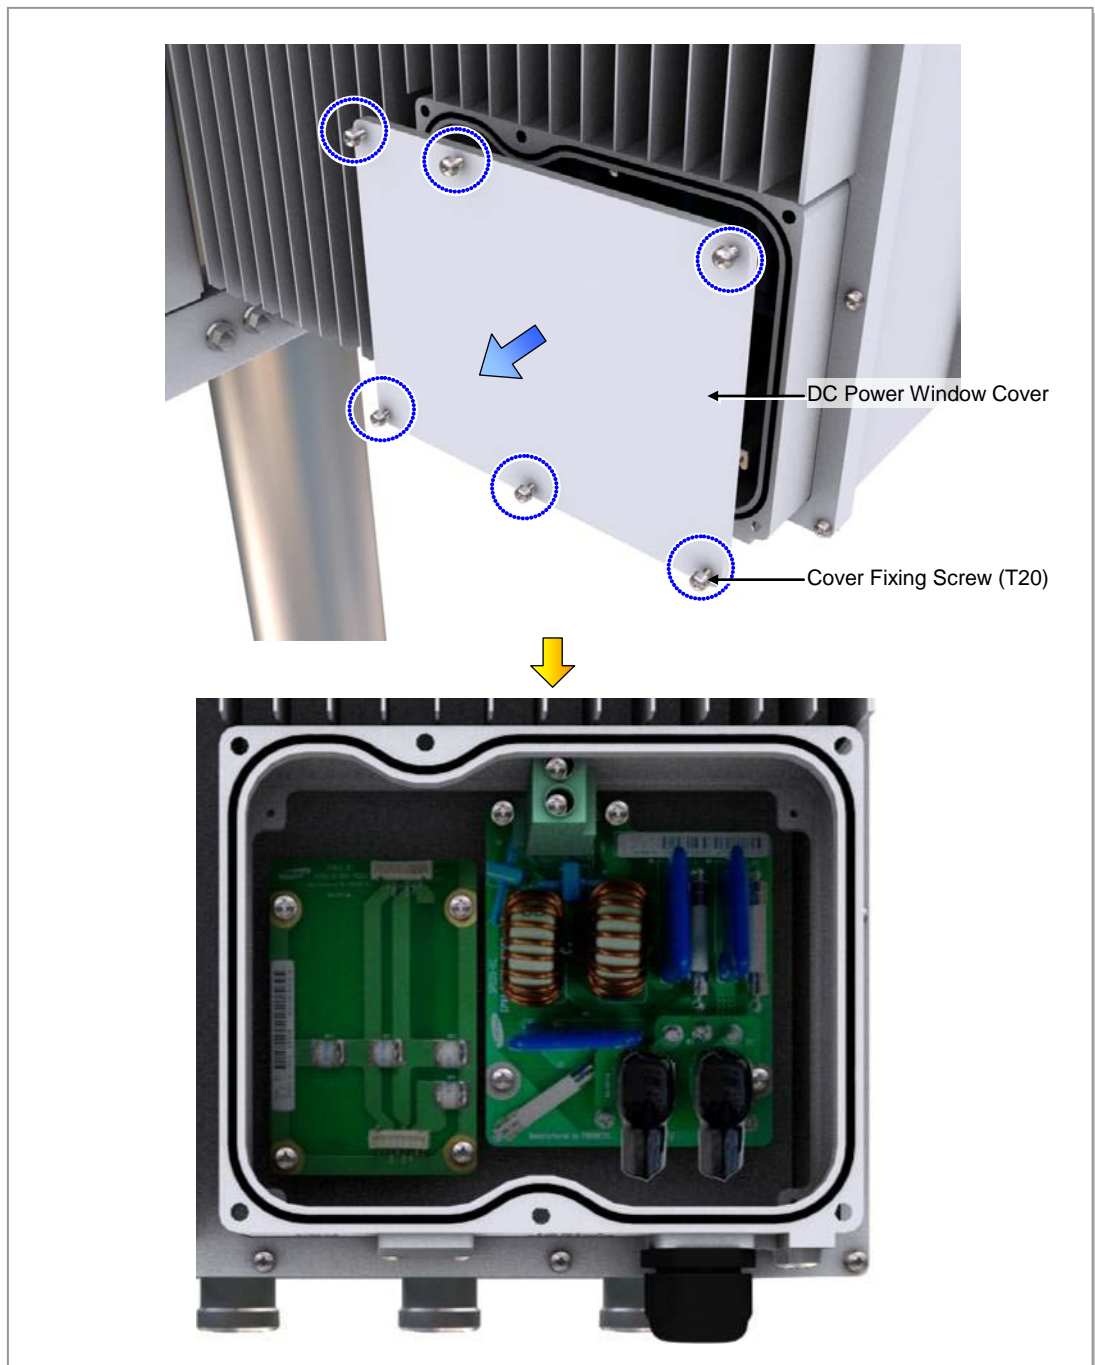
Connecting RRH-P4 power cable (AWG8) (1)
